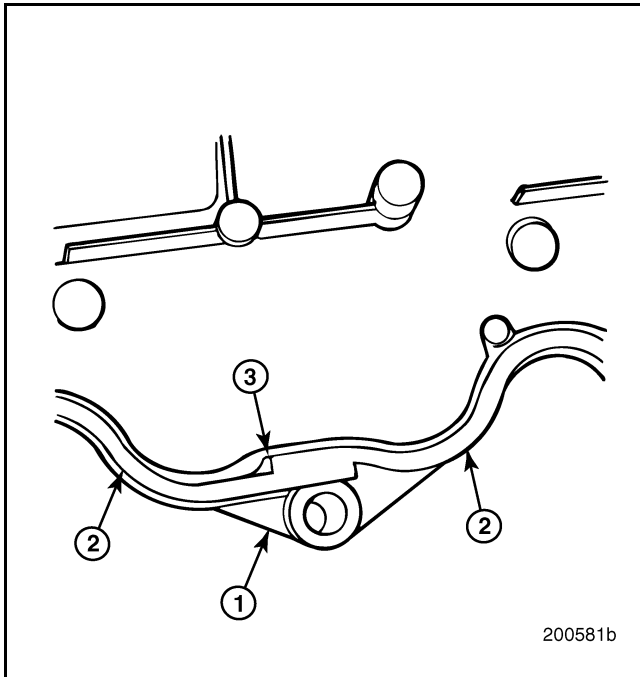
Gasket Installation (Offset Joined Section Shown)
